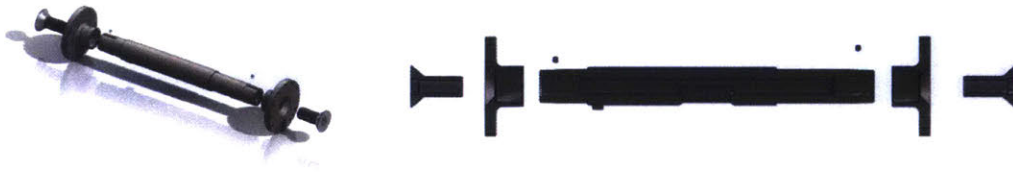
Exploded isometric and cross-section views of the tilt shaft and payload interface design
